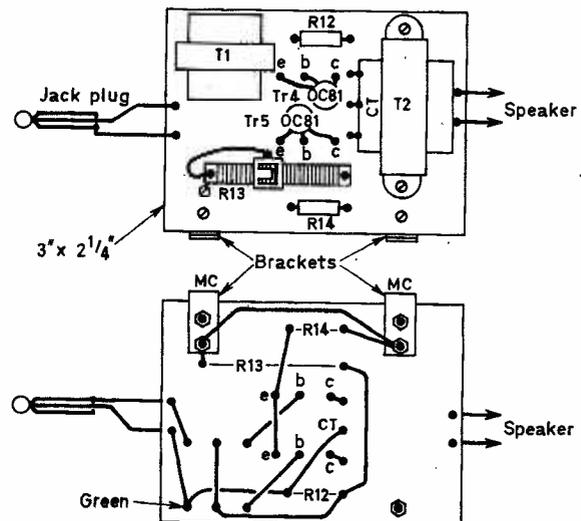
Views of amplifier circuit board. Care must be taken to ensure correct wiring of jackplug.
